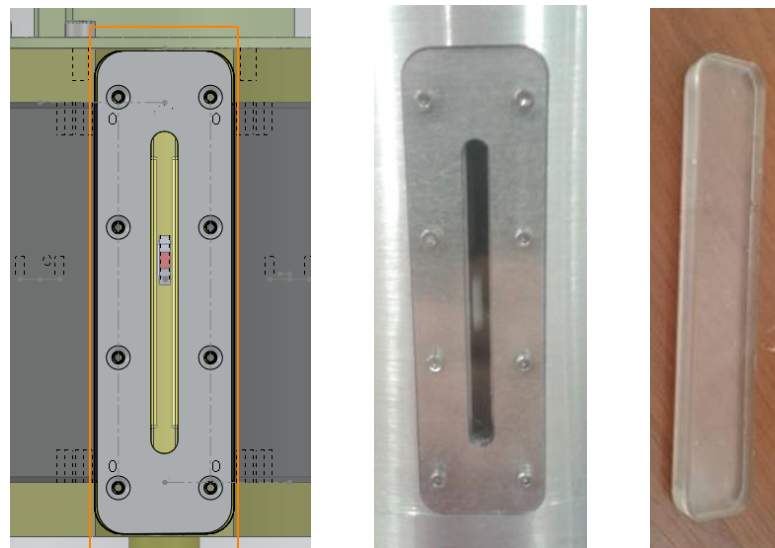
a) CAD sketch of indicator screen. b) real image after producing c) plexy glass.
